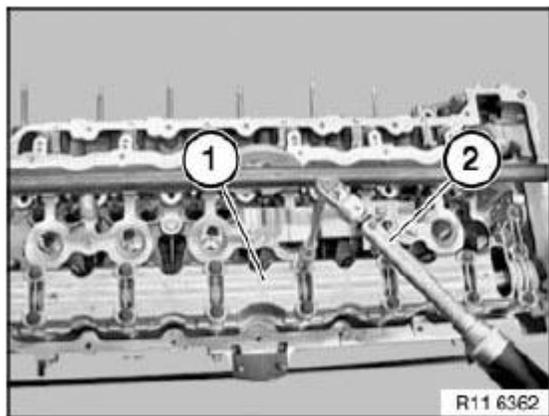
Identifying Lower And Upper Bearing Banks With Camshaft
